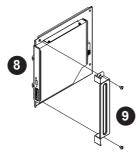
Installing the Upper Bracket on the DVD-ROM Drive
